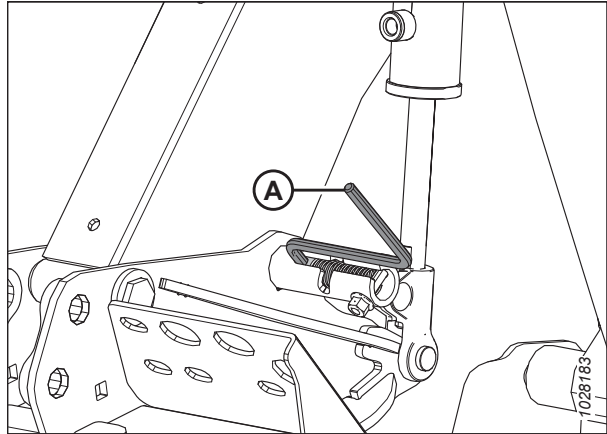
Engaged Reel Safety Prop – Center Arm
